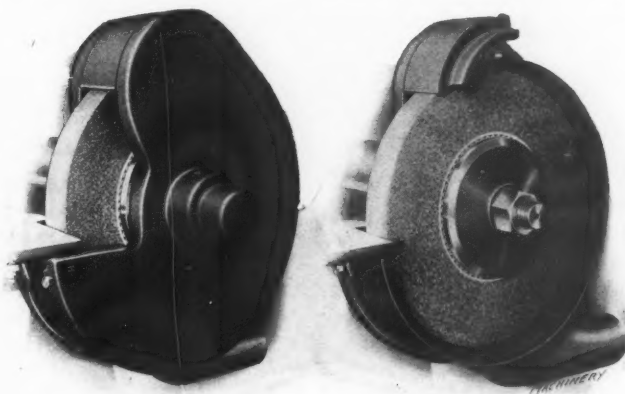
Protection- and Dust-hood of the Norton Model E Grinding Wheel Stand shown Closed and Open
